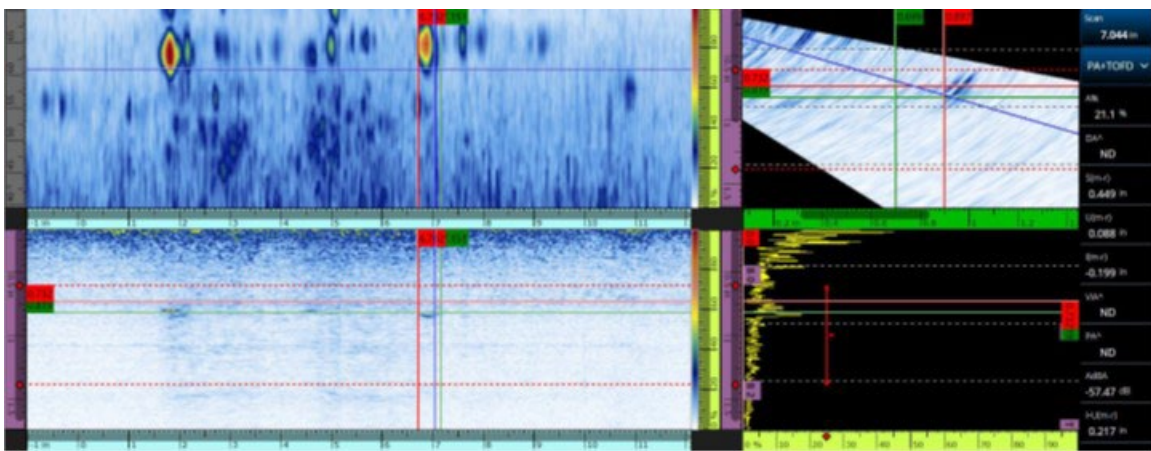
PAUT indication of defect at Location D in fillet weld test panel MGL-10 from OD-raster scan
